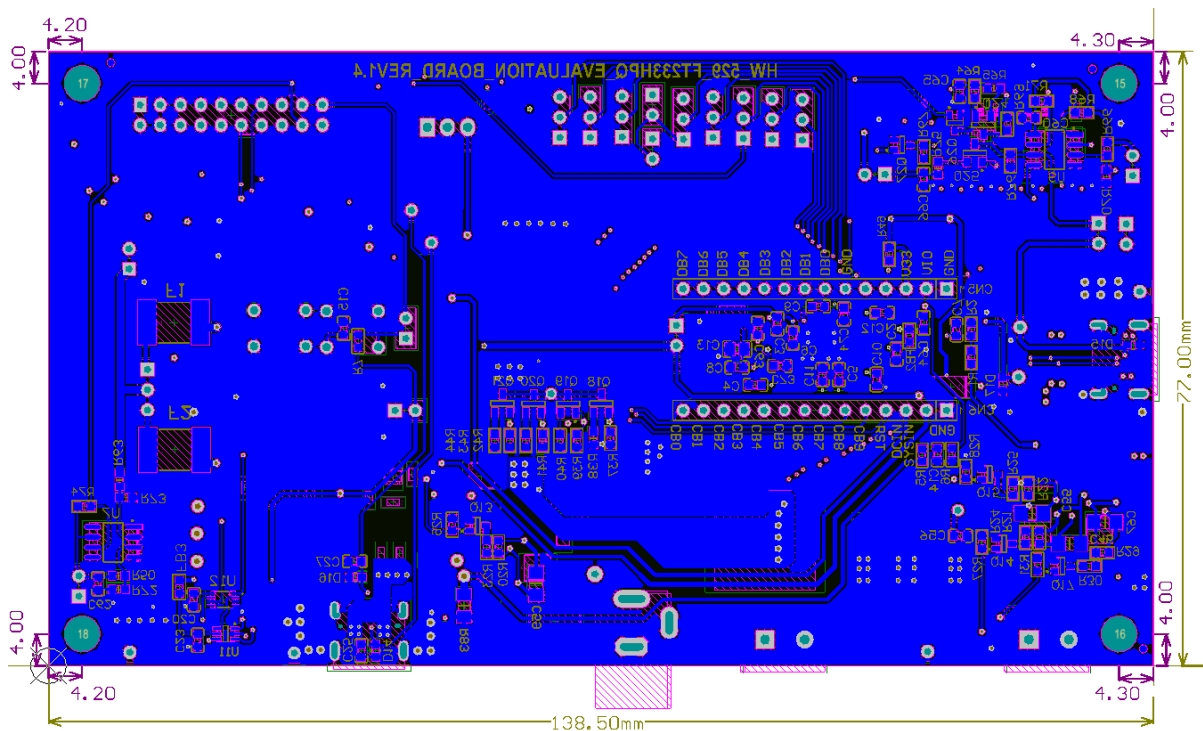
UMFT233HPEV Evaluation Module Board - Mechanical Diagram - Bottom View
